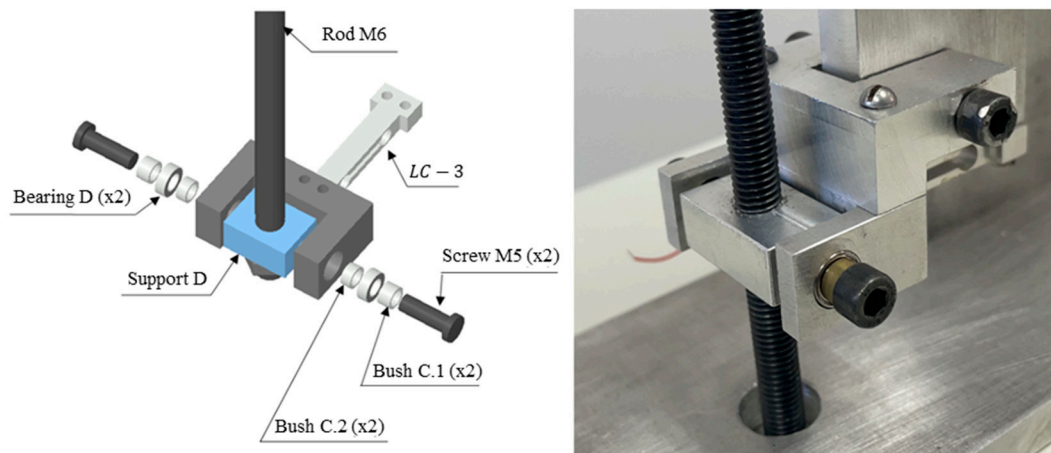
3D view (left) and manufactured assembly (right) for the pitching moment measurement.
